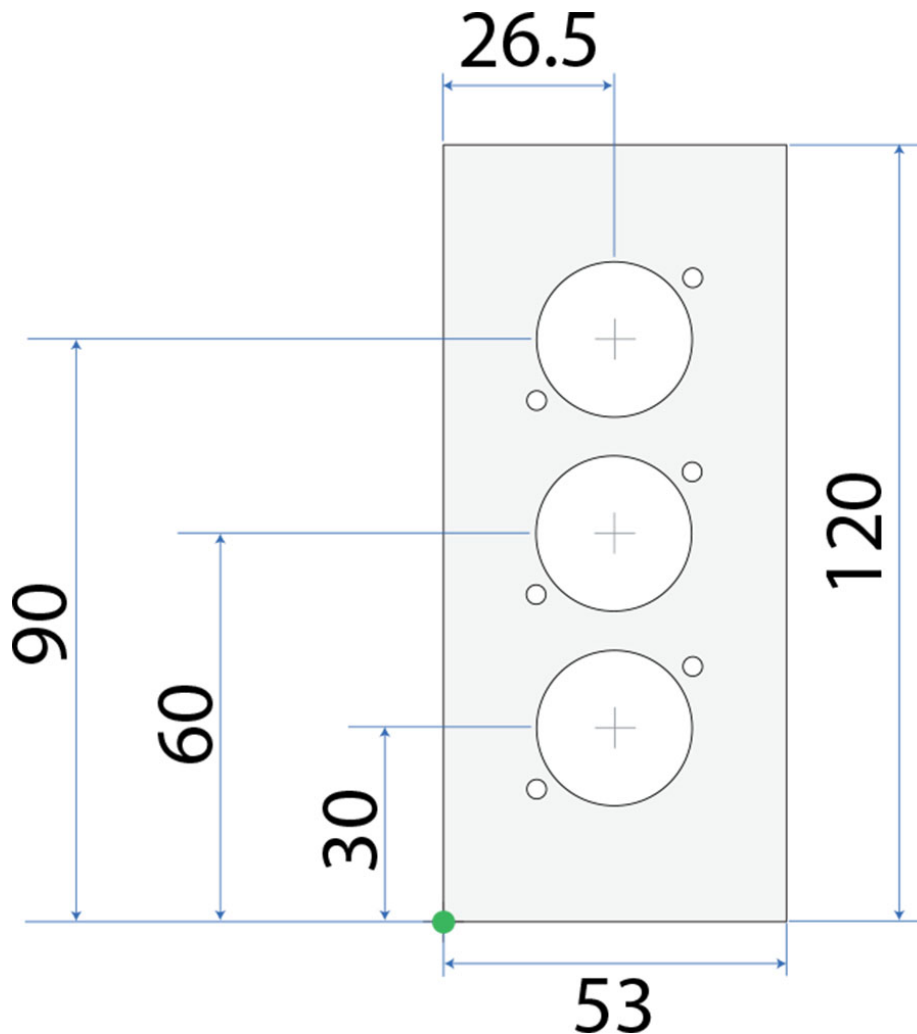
Dimensions for a set of three XLR socket holes.
